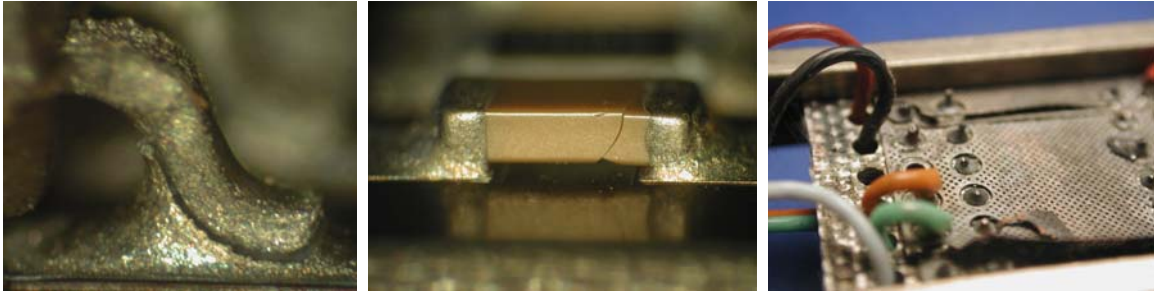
Common failure modes in traditional SMT assemblies (left to right): (a) open solder joint, (b) cracked capacitor, (c) polyimide degradation.
